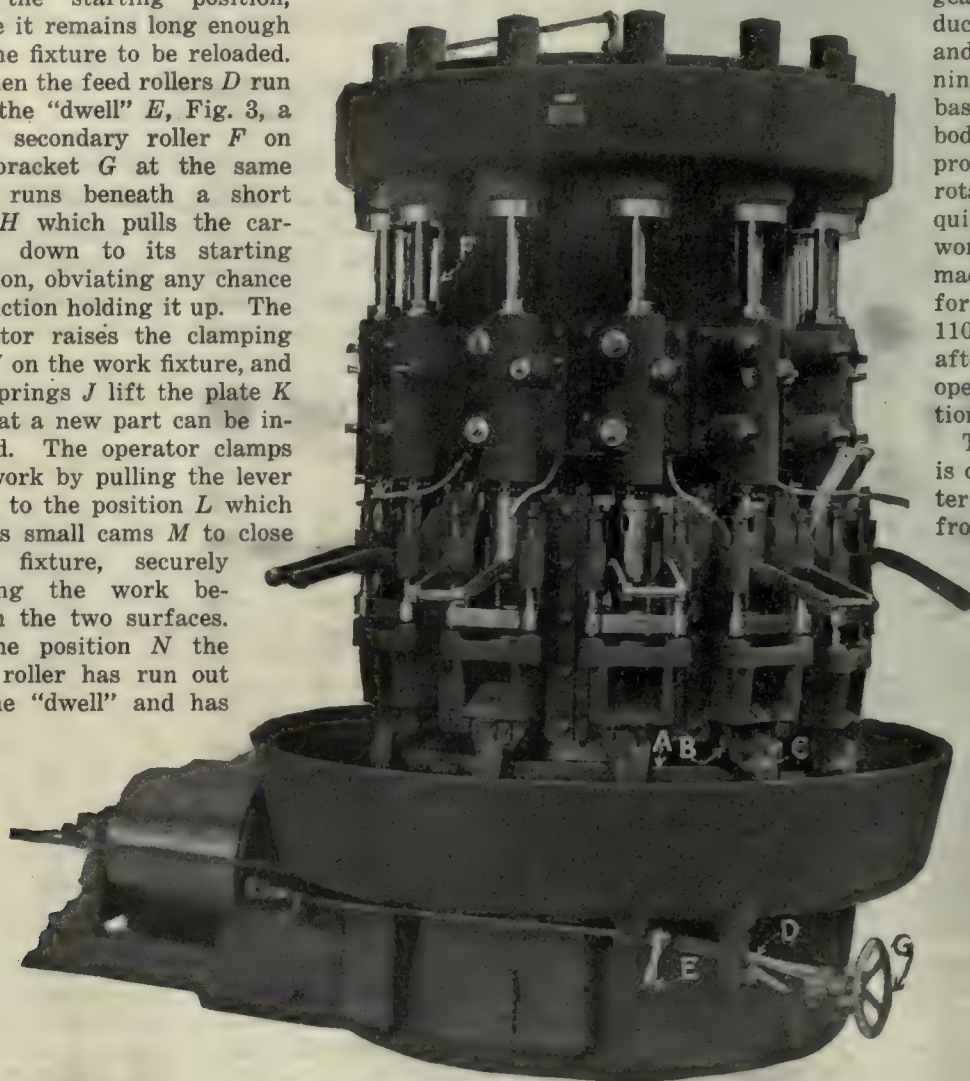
SIDE VIEW OF CONTINUOUS DRILLING MACHINE
